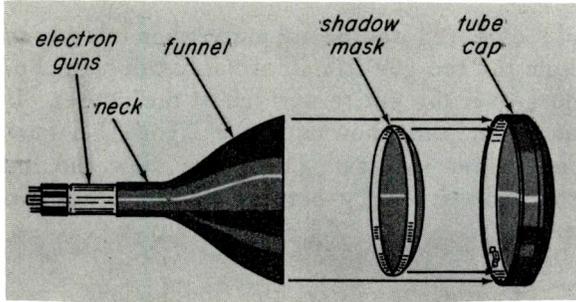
Exploded view showing the relative placement of the major parts of the color picture tube.
